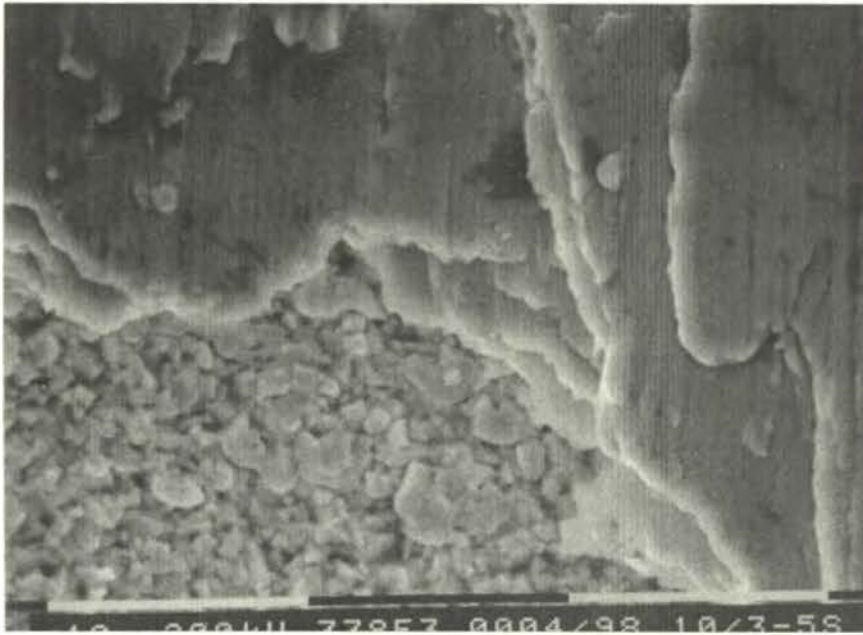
1 Layers of galled workpiece material on the rake face of a KC730 tool after 5 seconds of cutting, indicating presence of seizure and secondary flow zone when machining Inconel 718 at 75 m/min and 0.14 mm/tooth
